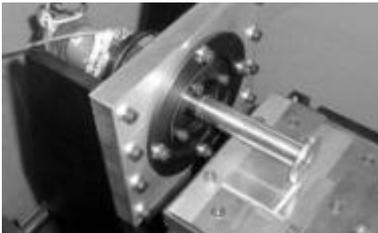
27 kHz complex vibration seam welding system.
